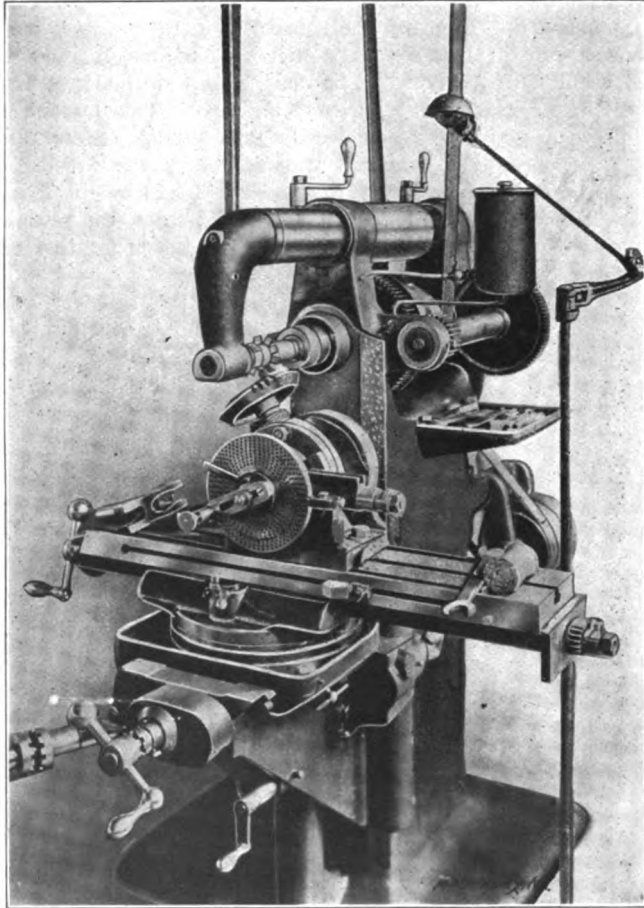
General View of Machine as Arranged for Cutting Bevel Gears.
